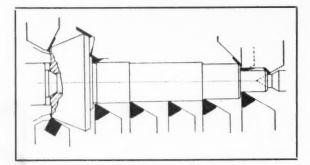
A new 16-inch Fay automatic lathe has been developed for turning forged driving pinions as shown in this sketch.
